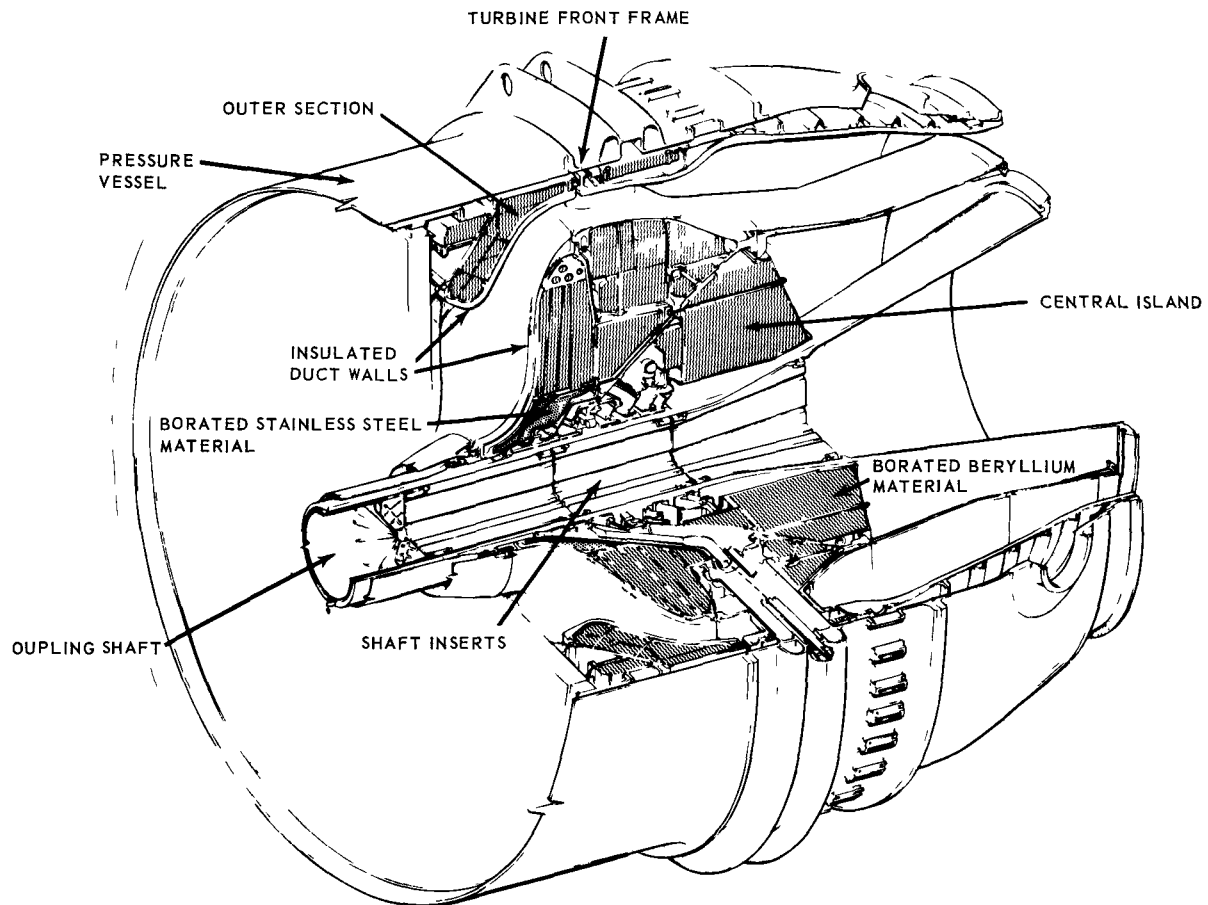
Isometric cutaway view of XNJ140E-1 rear shield assembly
